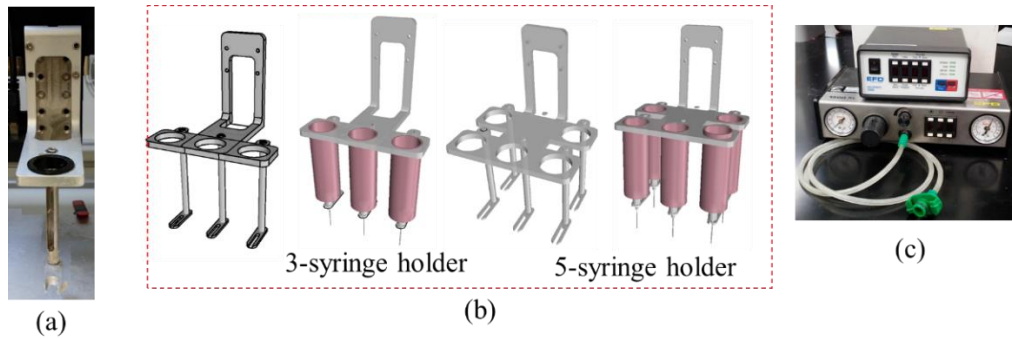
(a) Existing nozzle holder, (b) Proposed nozzle holders, (c) External air pressure controllers.
